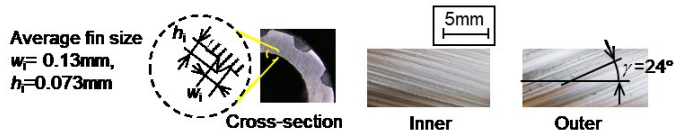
Shape of extruded aluminium alloy using die with fins (material: AA1100, die fin shape: [C1] $w_d=1.15\text{mm}$, $h_d=1.0\text{mm}$)
